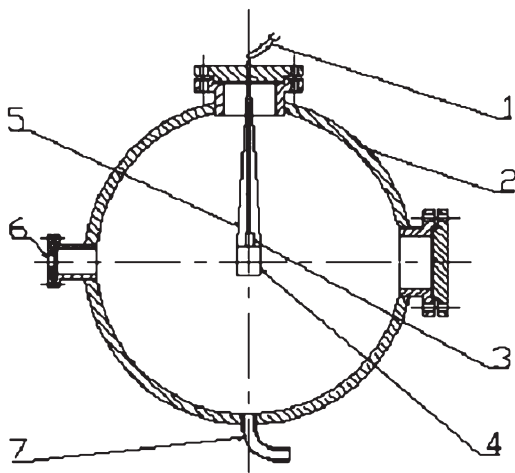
Schematic of the explosive chamber. 1—Power line; 2—explosion chamber; 3—detonator; 4—explosive; 5—lifting rope; 6—exhausting hole; 7—deslagging pipe.
